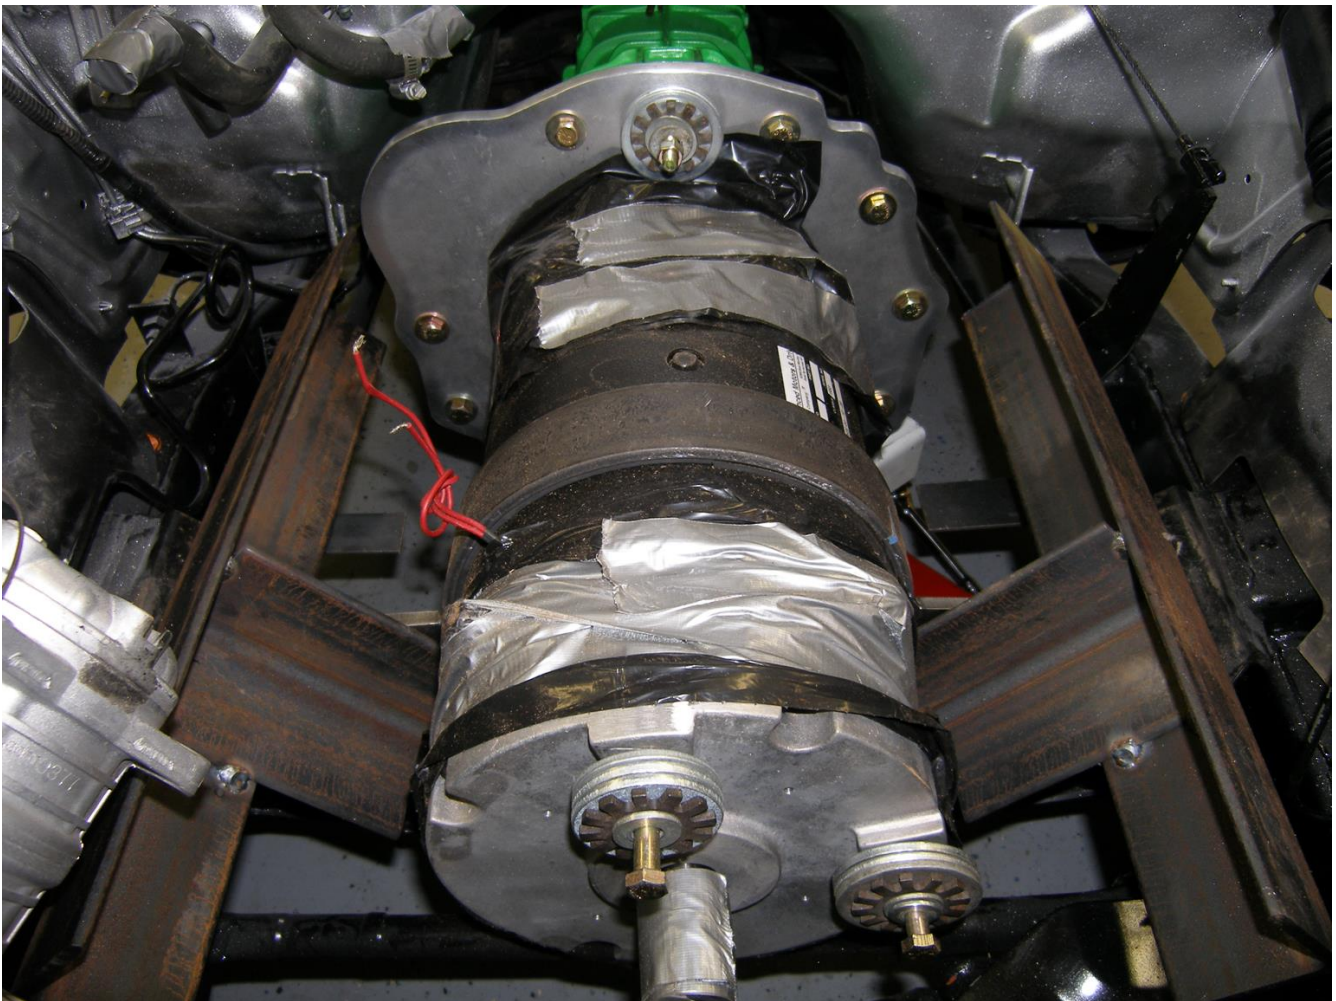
7 The motor shown wrapped to prevent foreign matter from entering the motor vents.
